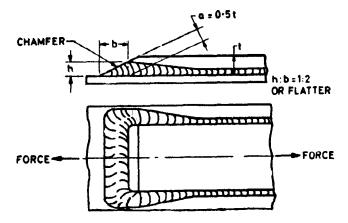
END FILLET WELD NORMAL TO DIRECTION OF FORCE
